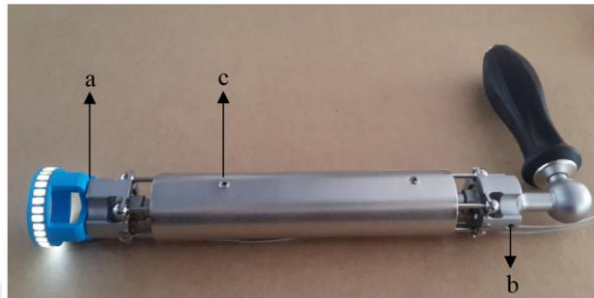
Updated version of the uterine manipulator, which was designed as suitable for conventional manufacturing techniques. (a) Shrink fit junction between cap and platform, (b) Jamming screws to fix handle to platform, (c) Fixation of hemi-cylindrical cover parts by using isometric screws.
